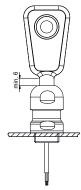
Mounting of pms sensor with sensor screw connection BF-pms/A1
